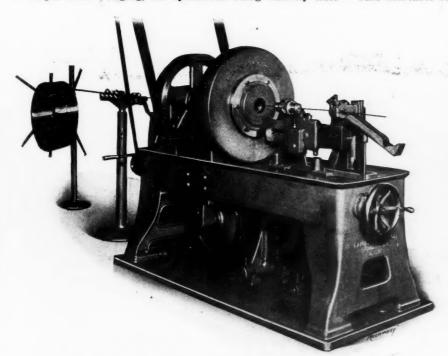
Langelier Swaging Machine for making Wire Spokes for Automobile Wheels
